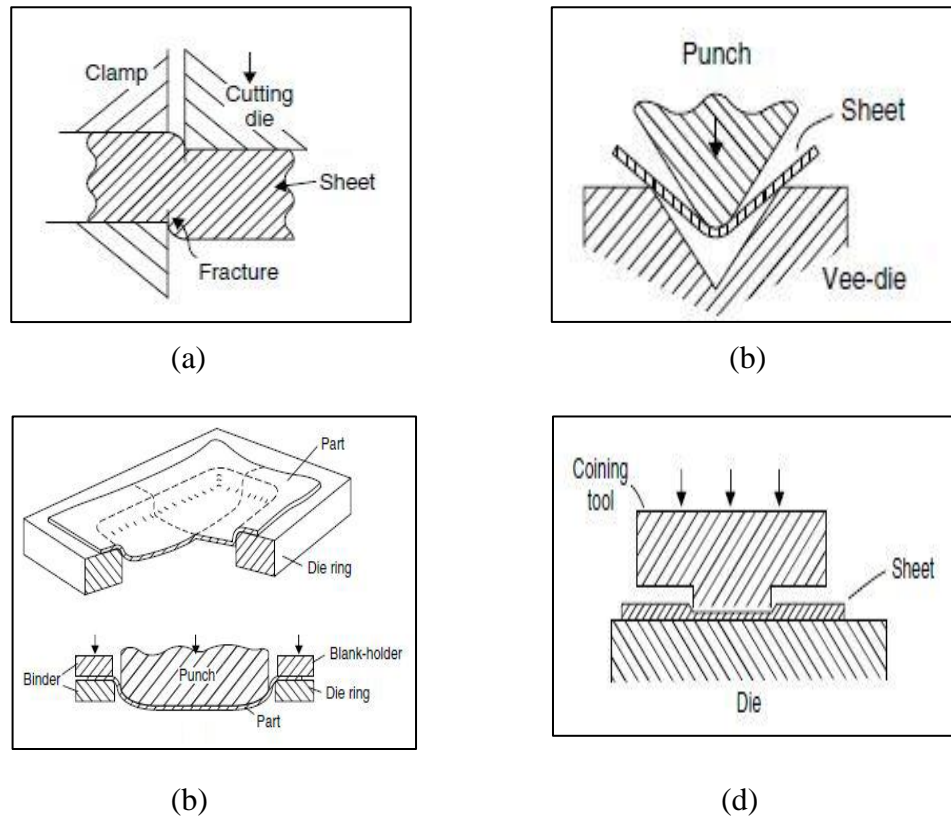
(a) Basic cutting process of blanking and piercing. (b) Example of sheet metal bending process. (c) Typical part formed in a stamping or draw die. (d) Thinning a sheet locally using a coining tool.
